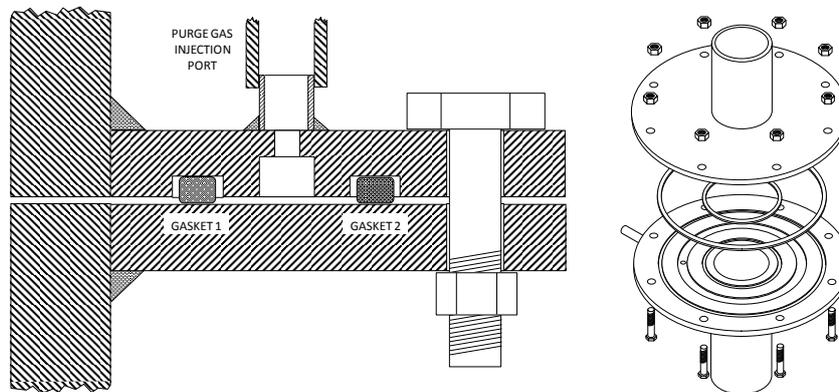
Purge flange section showing gaskets and nozzle (left), assembly view (right)
